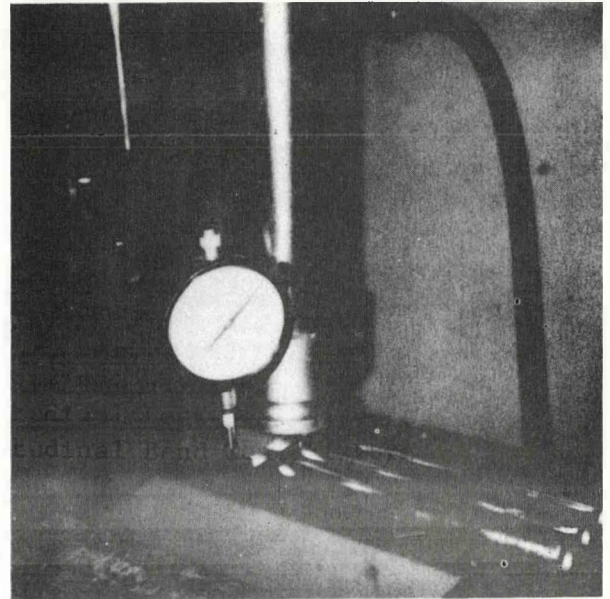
Absorber Panel Longitudinal Bend Test Fixture
